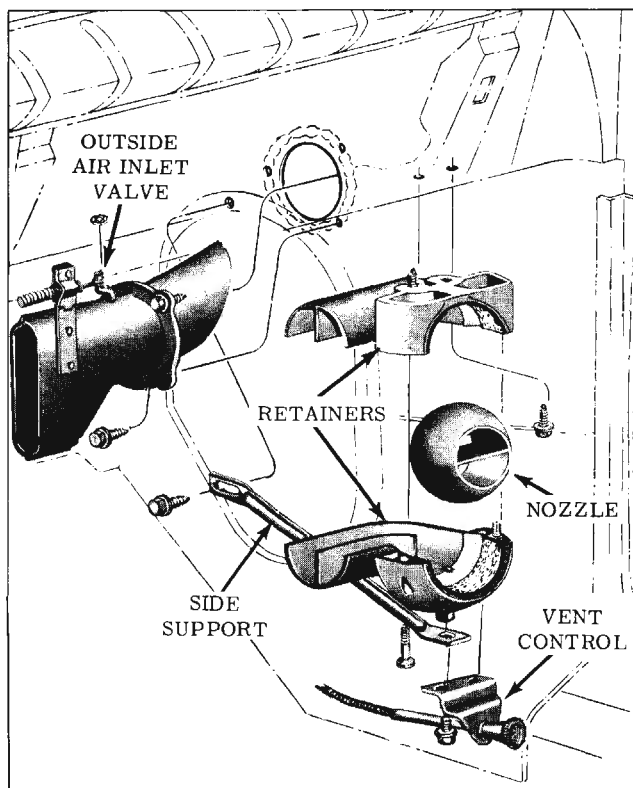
Air Outlet and Outside Air Inlet Valve
